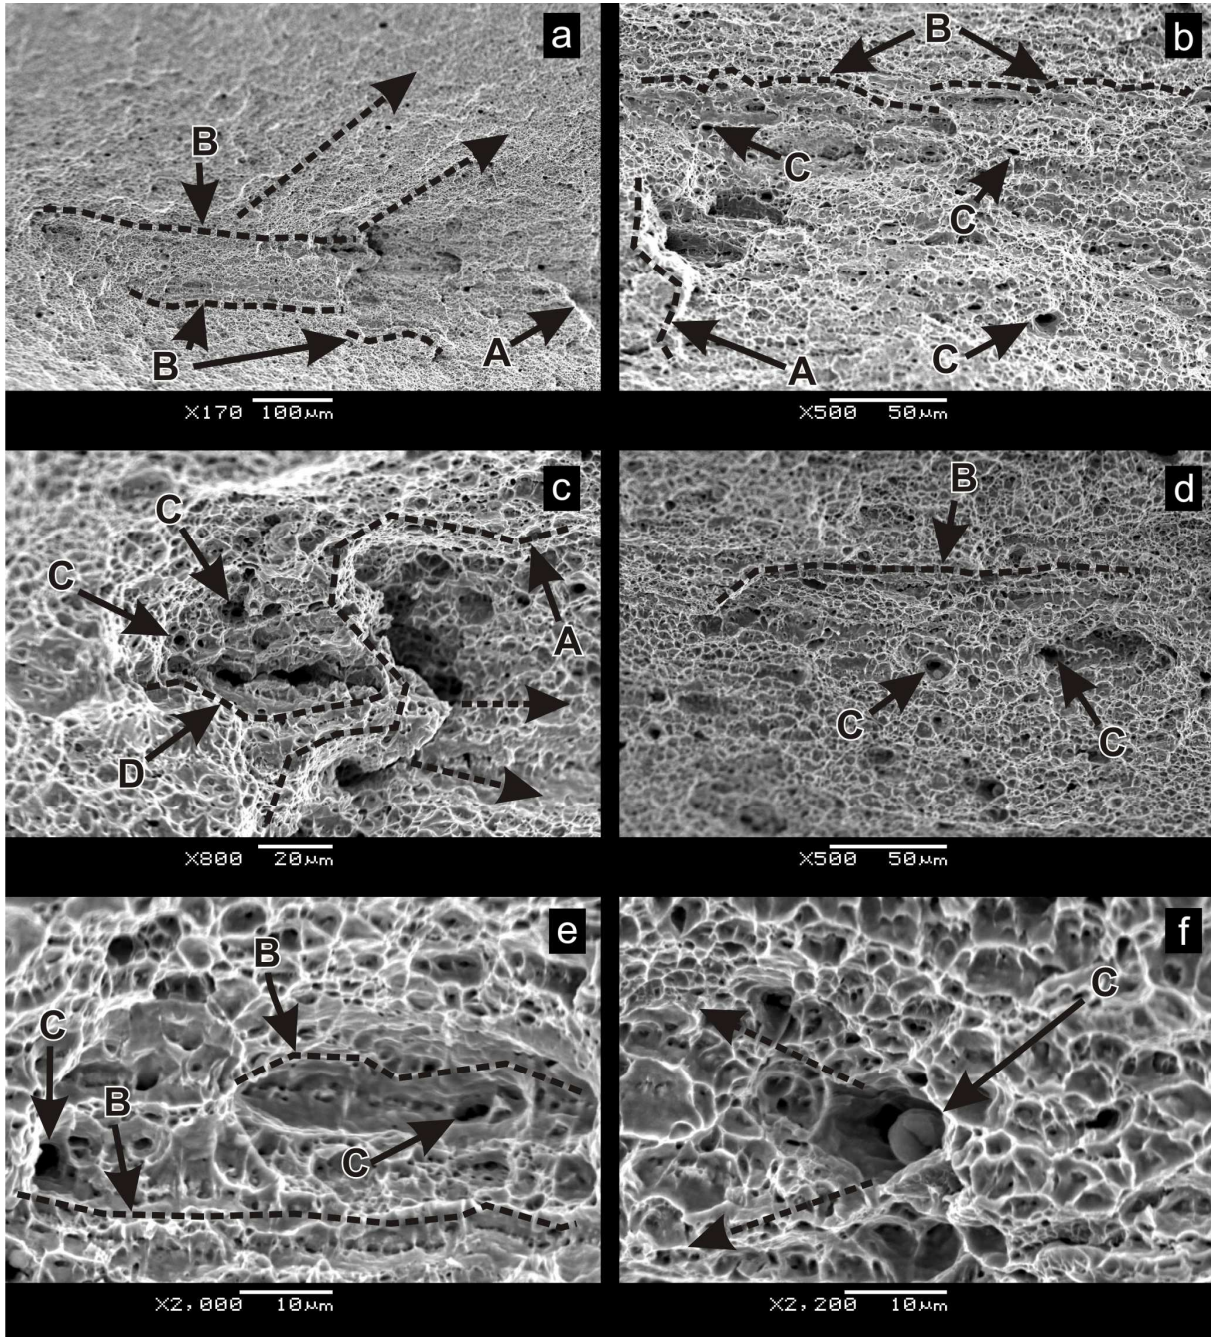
SEM Analysis of a welded DP600 '16s' sheet steel specimen that fractured in the BM. Image a), b), and d) show 'strings' of voids that were believed to be micro-crack initiation site, image c) shows a site of shear tearing, and image e) and f) show that large micro-voids had appeared to be located at initiation/termination sites for micro-cracks.
